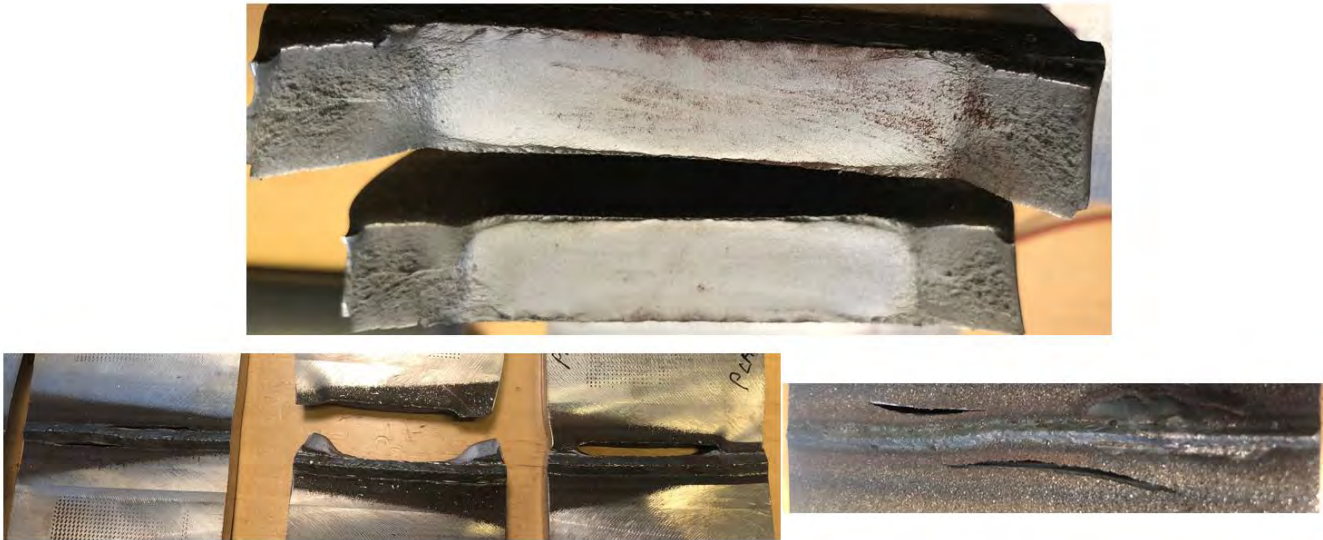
Upper: Fracture surfaces of butt weld after fatigue testing. Lower: Different types of fracture location.
